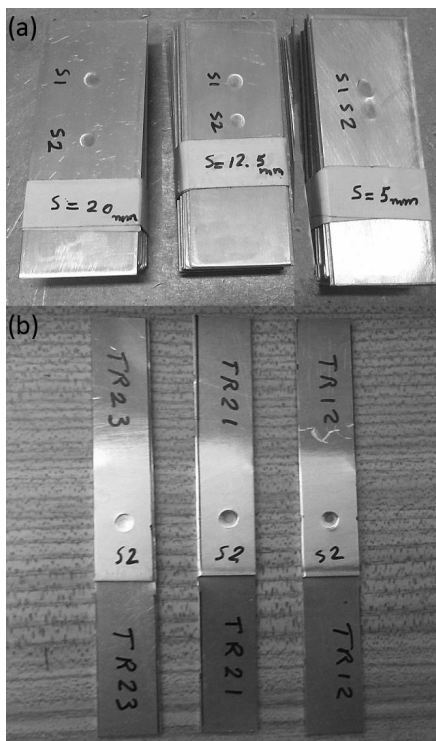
Welded specimens for a) dimension checking, b) tensile-shear test (after cutting along A-A line)
